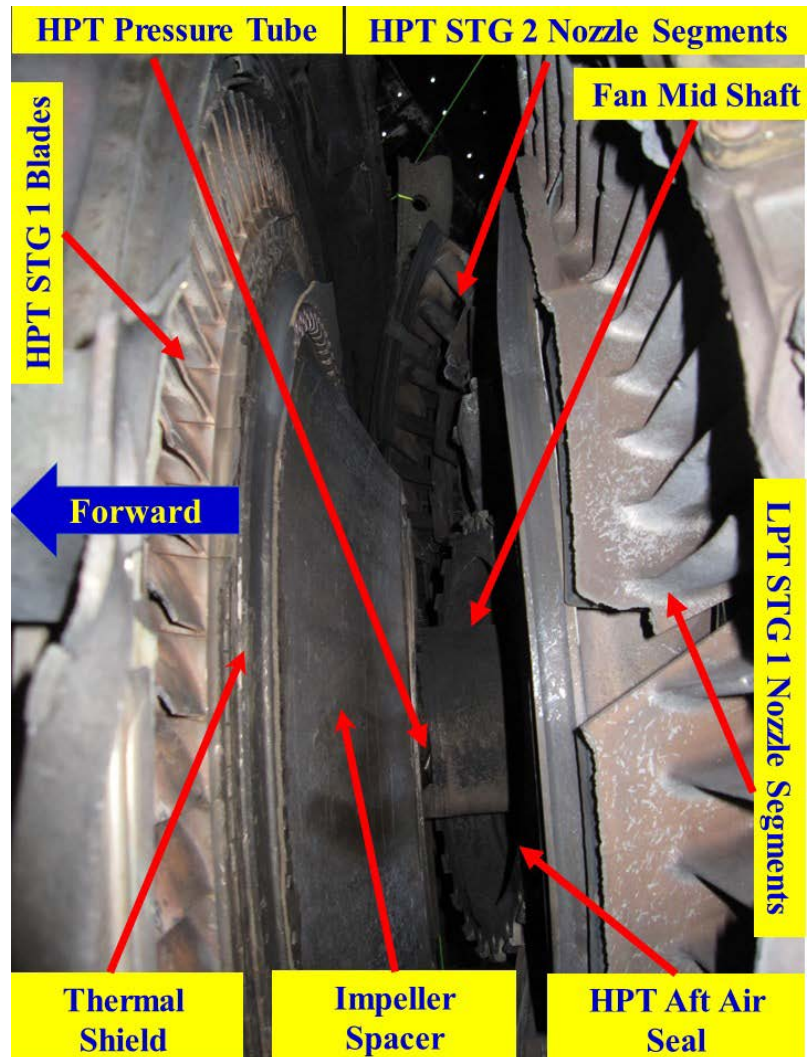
HPT STAGE 1 DISK, THERMAL SHIELD, IMPELLER SPACER, AND HPT AFT AIR SEAL DAMAGE
